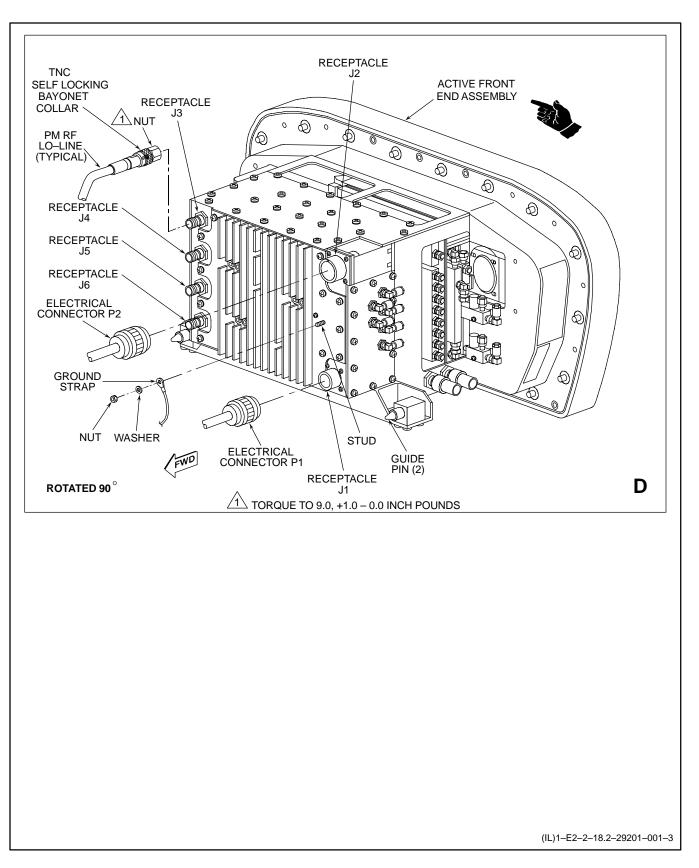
Removal and Installation of Antenna Assembly AS-4522/ALQ-217 (Sheet 2)
